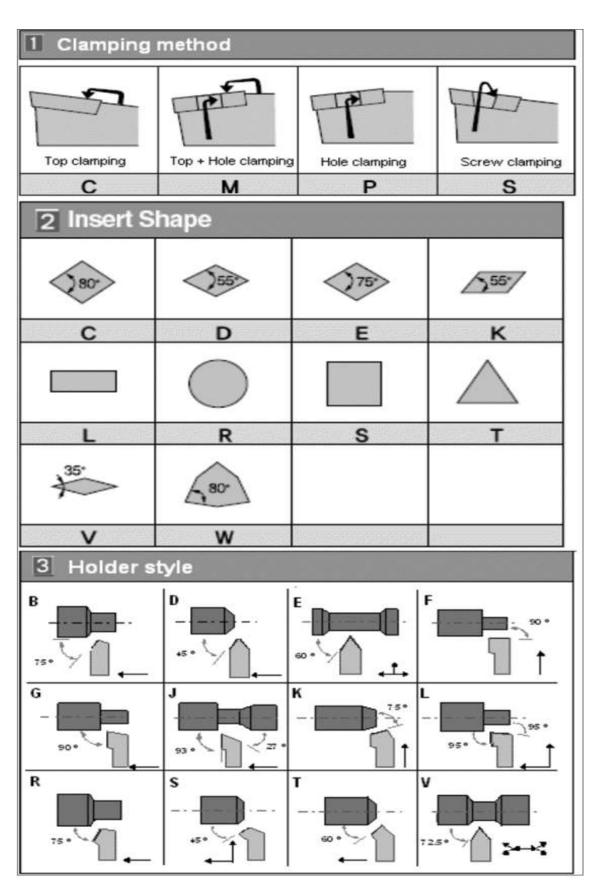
Clamping Method, Insert Shapes, and Holder Style
